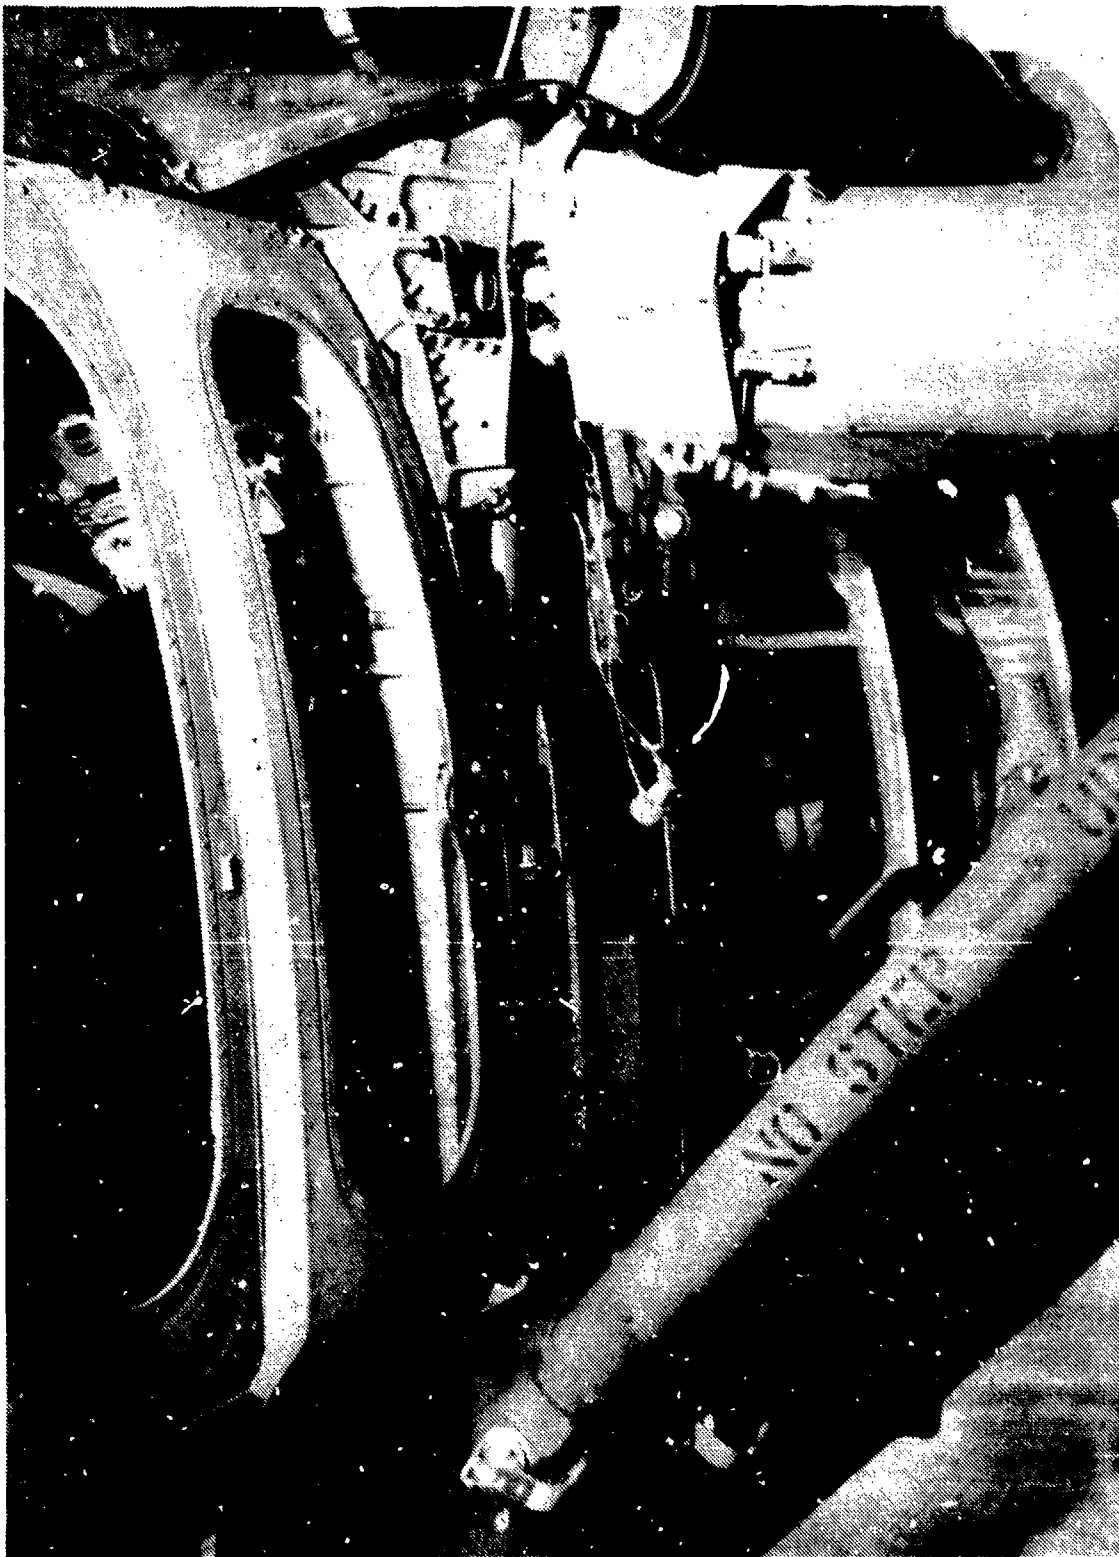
ESSS Installation onto Fixed Provision Mounting Points
